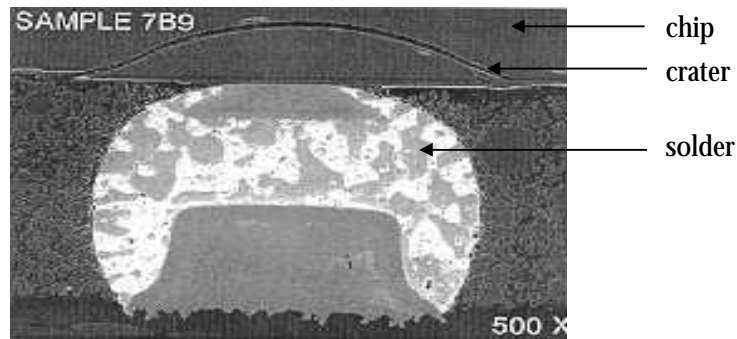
Si cratering due to thick plated copper bump¹
